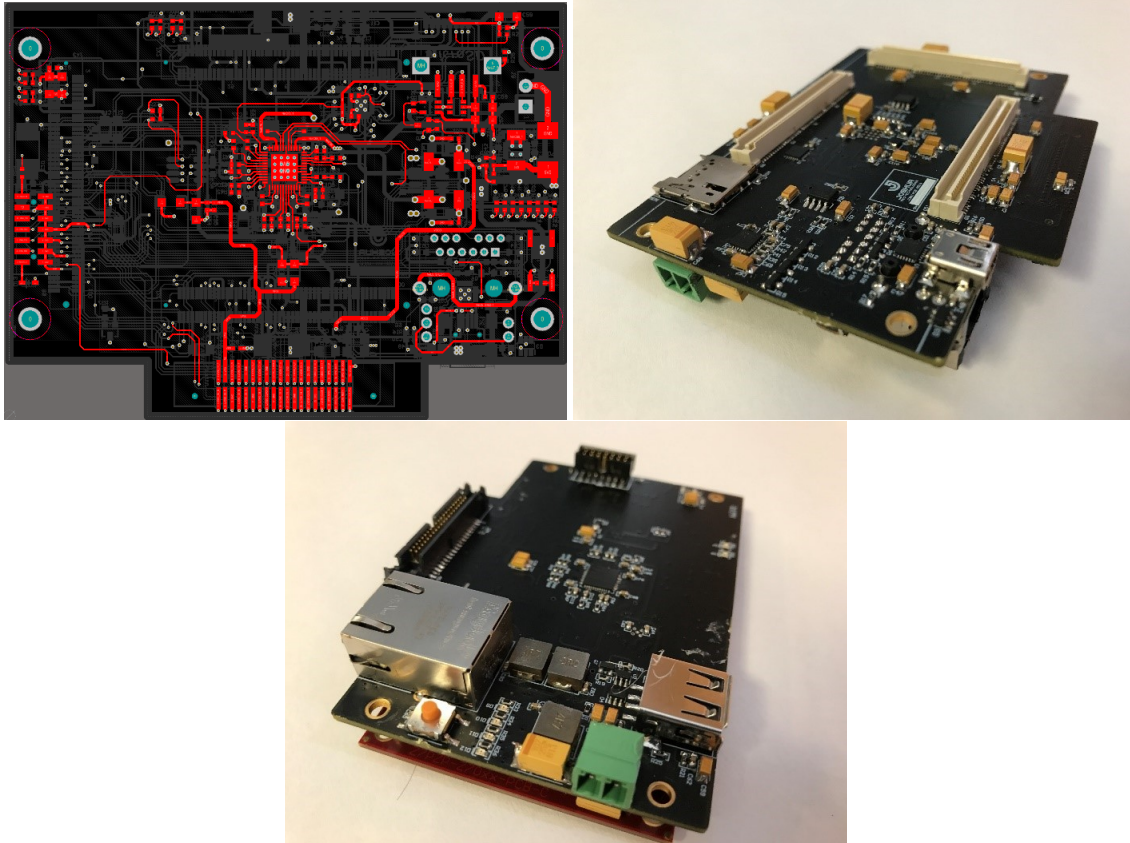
Top design layer of interface PCB in Altium Designer and Assembled Interface PCB
